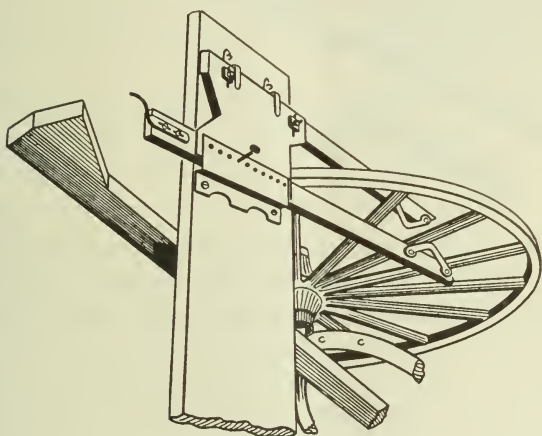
Fig. IV. The lever complete as it rests upon the board that supports it. Three guide plates and pivotal pin hold the lever in place. Two of these plates are on the left and one on the right. The one on the right has holes in its left margin through which the pivotal pin passes. On the upper ends of the two pieces of the lever are V-shaped guide plates. When the spokes strike these plates the lever moves back and forth. On the lower end of the lever is an iron that catches into the staple on the bow.
